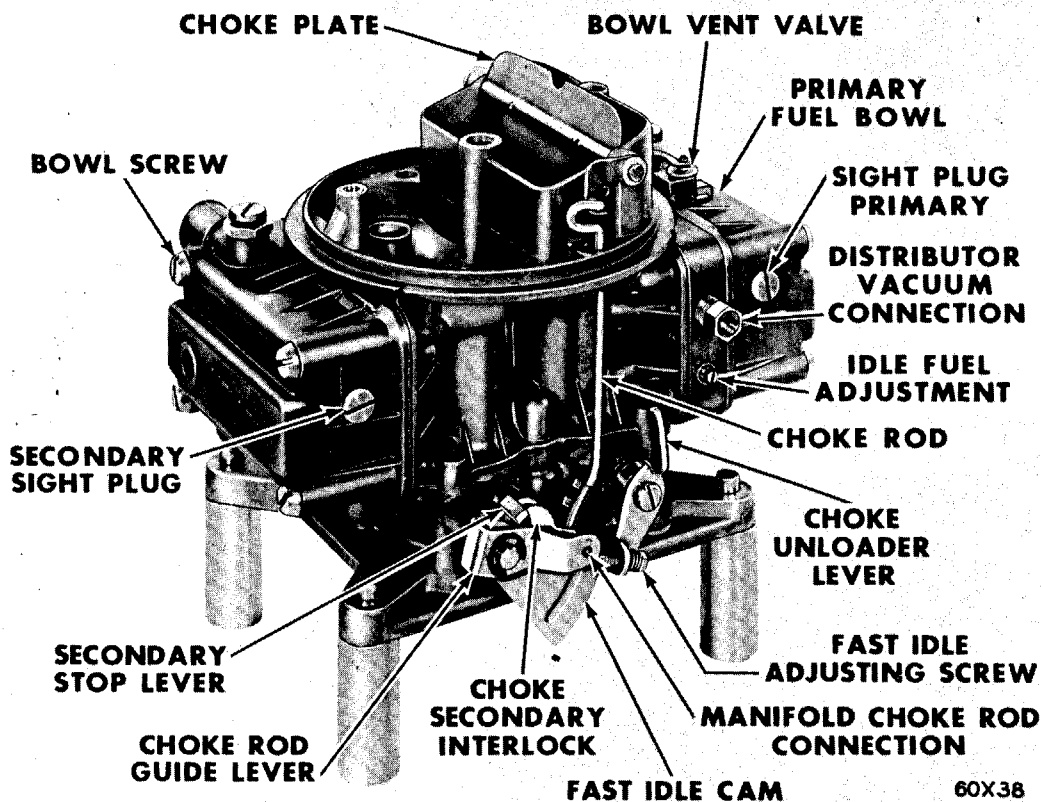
Carburetor Assembly (R2052A and R1971A)
